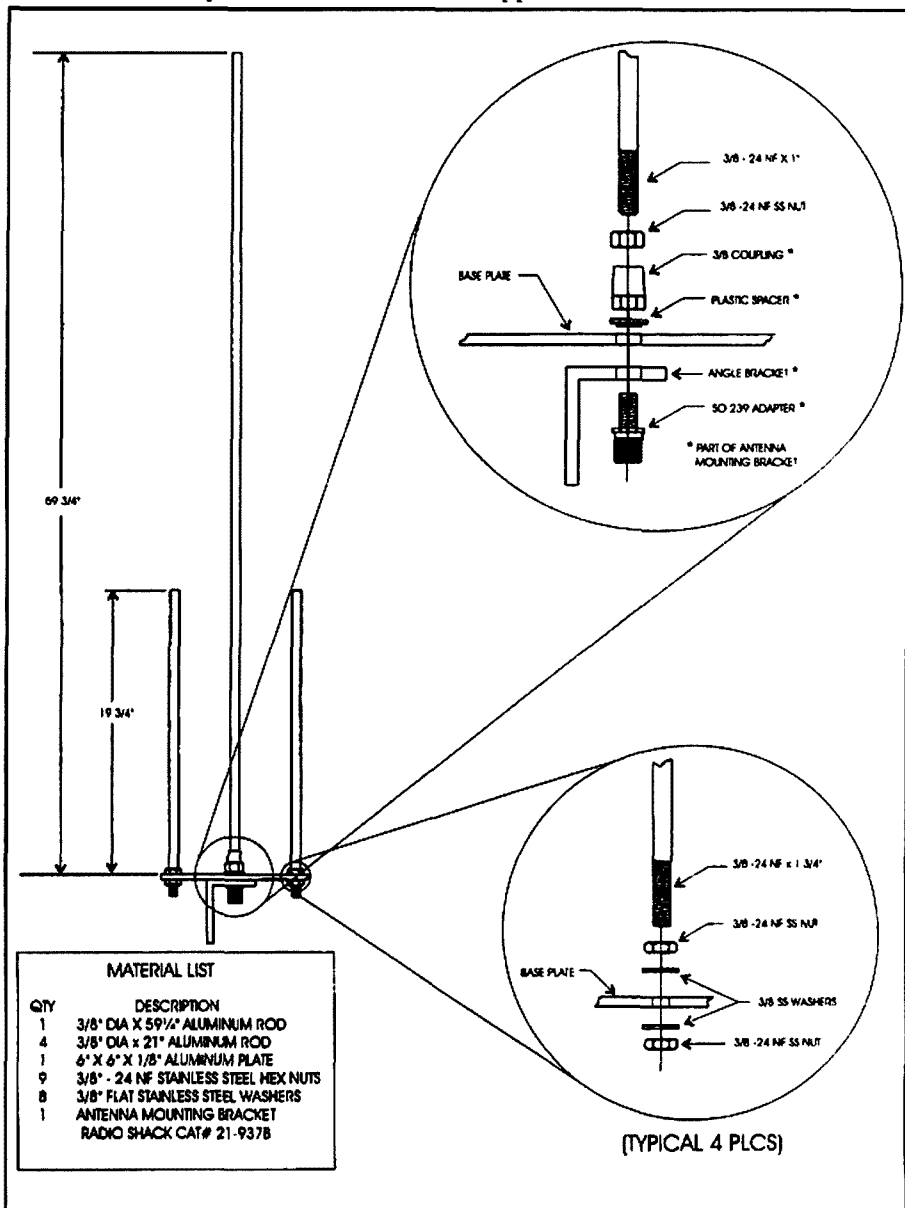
Assembly Drawing of Skeleton Sleeve Fed Monopole.
